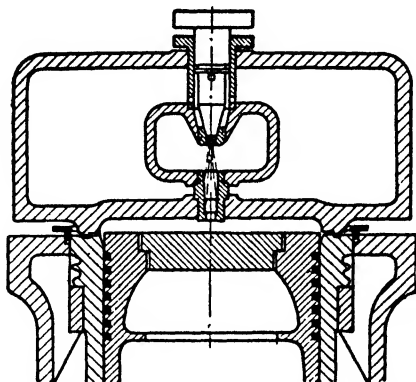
KOERTING CYLINDER HEAD WITH PRECOMBUSTION CHAMBER.
